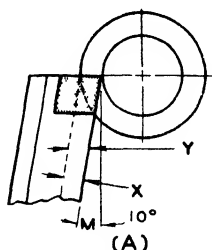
Flat Forming Tools with Dovetails, Tongues, and Grooves
